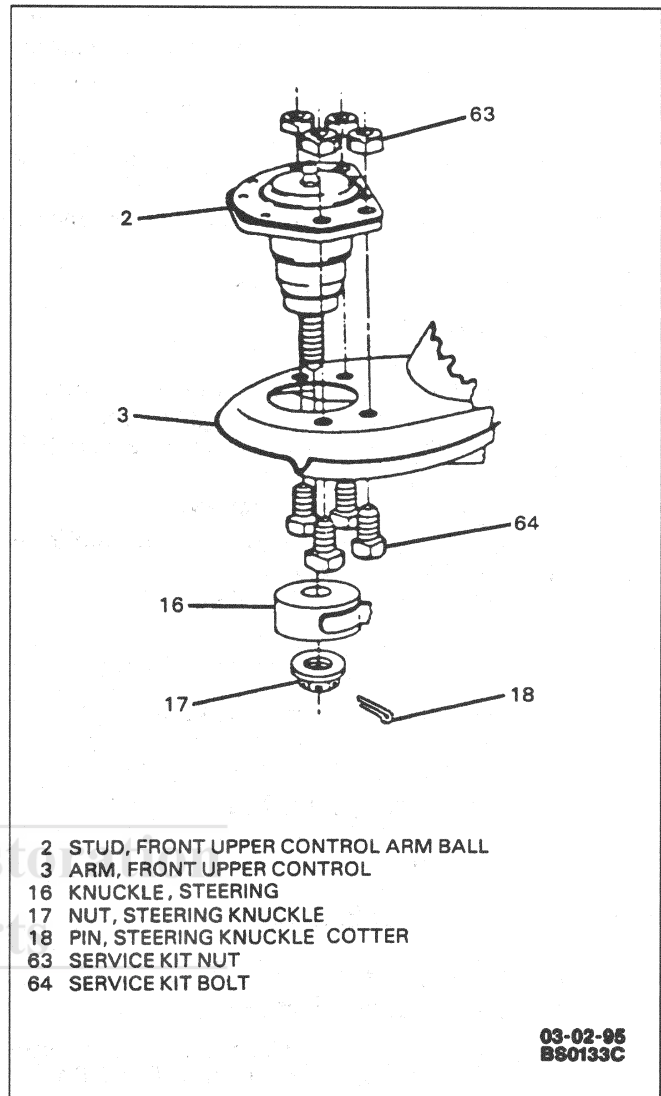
Front Upper Control Arm Ball Stud Attachment
